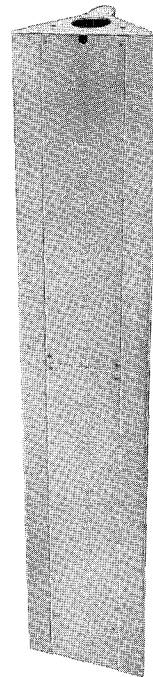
KS-19425, List 25 Lower Backboard Plate and Cover Assembly
